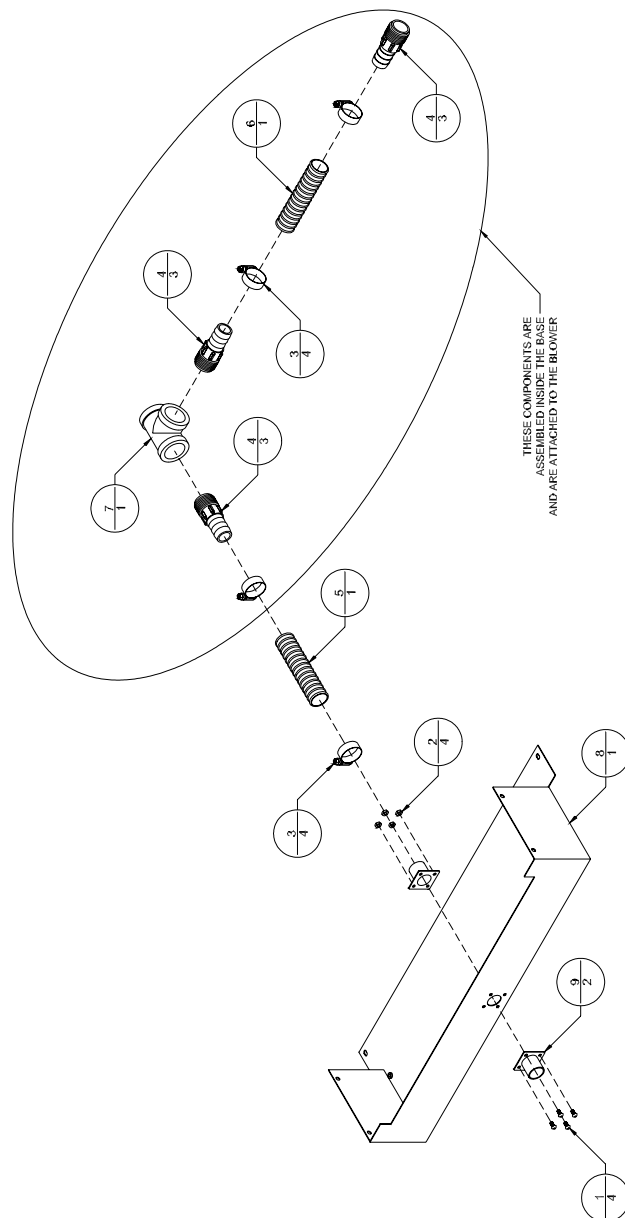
Lower Gap Assembly – BK703/BK7IB (9101411A)
